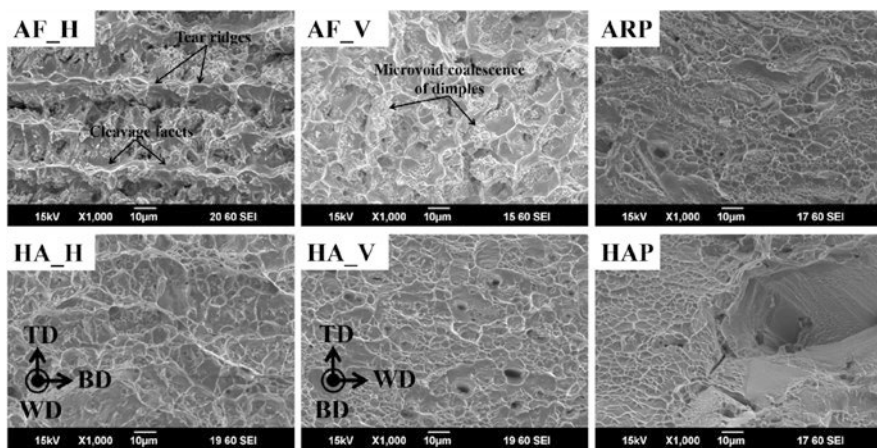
SEM micrographs of fracture surfaces for different specimens after room temperature tensile test
